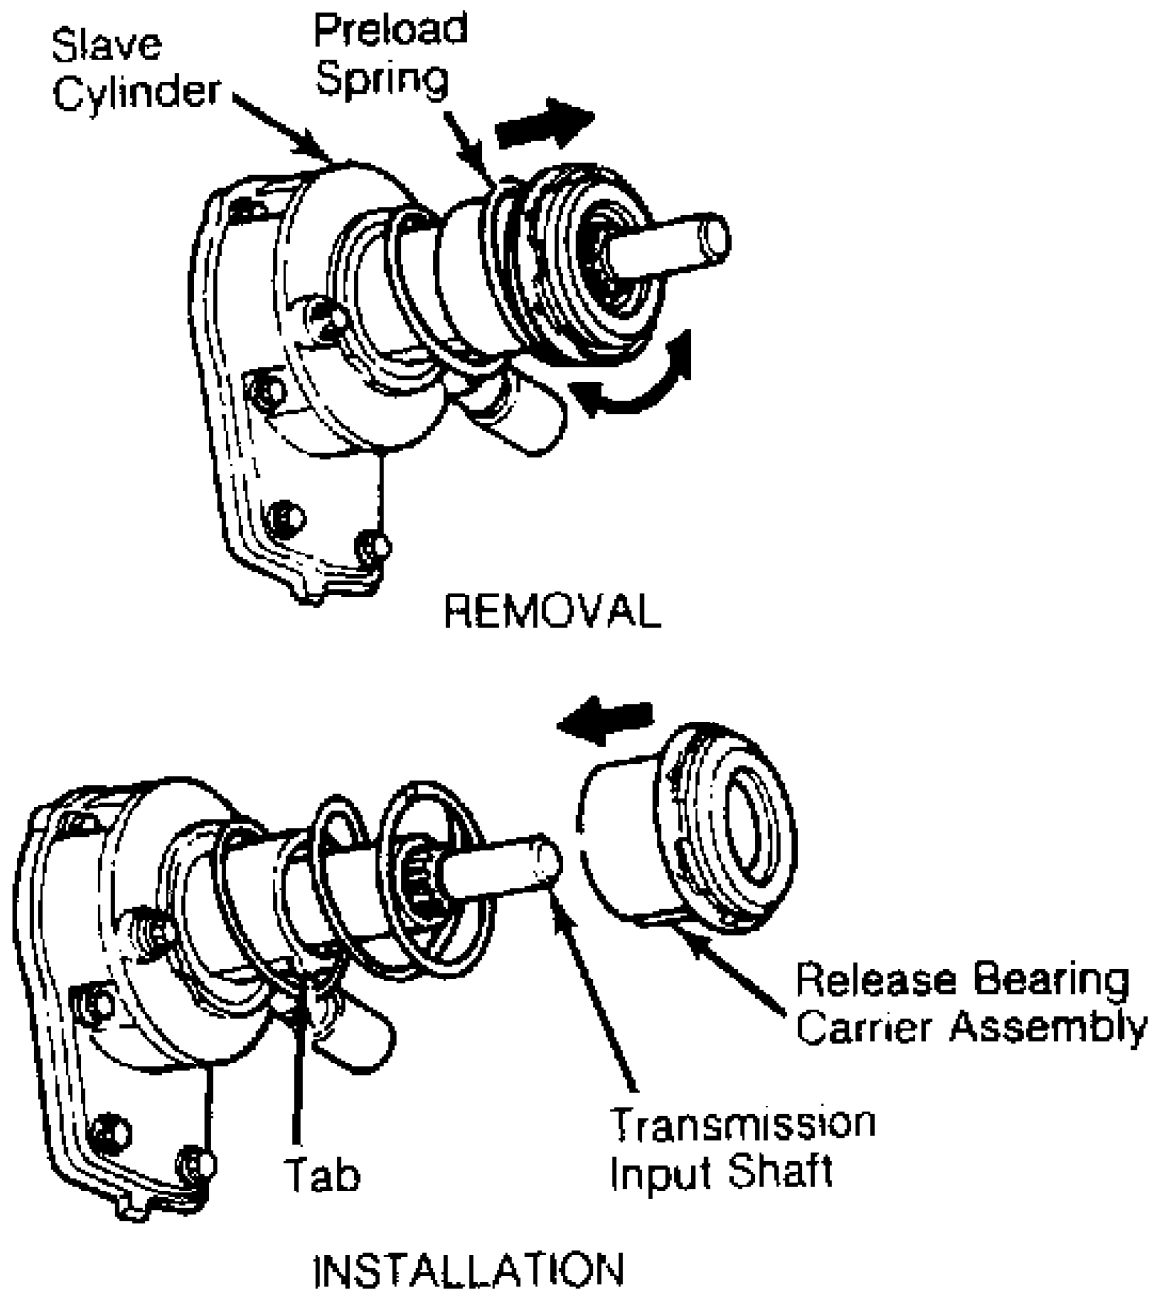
Servicing Clutch Release Bearing (Navajo)
